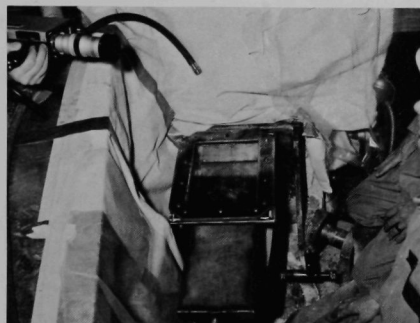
Access Port Installed on Inlet Elbow with Cutout Section Ready for Removal. ANL Neg. No. 103-N5873.
